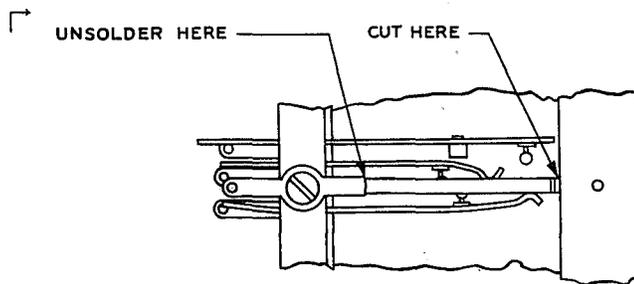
Points at Which to Cut and Unsolder Sleeve Terminals in 229-type Jacks
